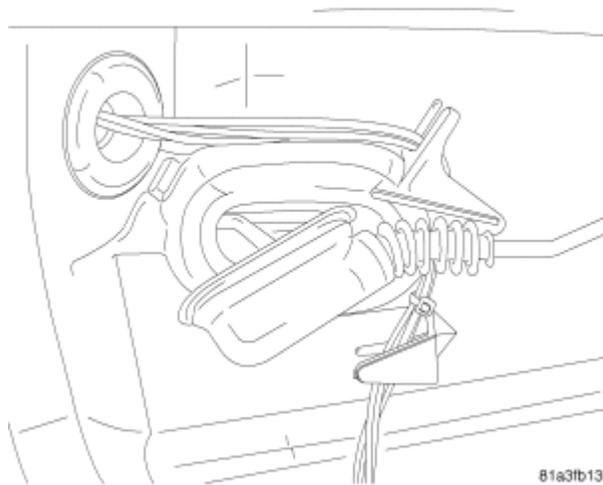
Removing/Installing Interior Handle Lock Rod And Grommet
